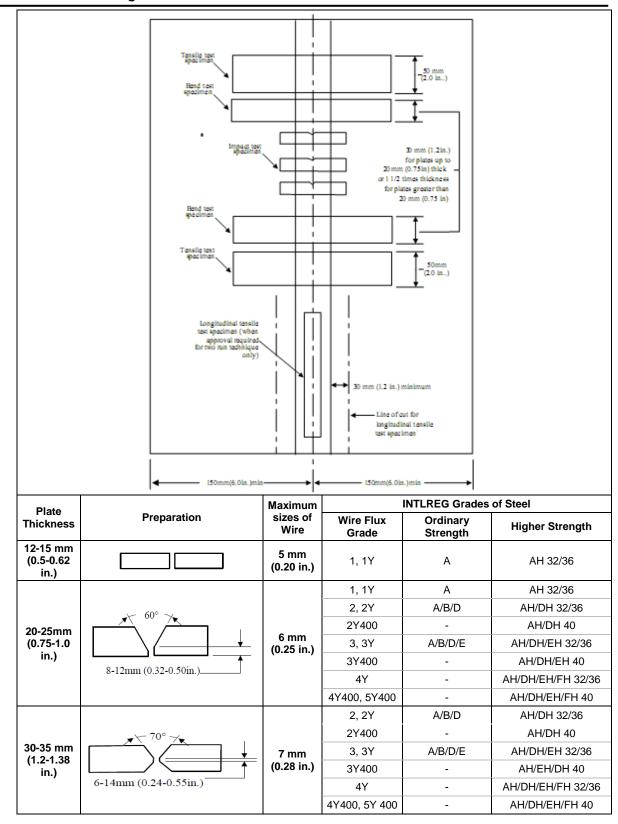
Butt-Weld Test Assembly for Submerged Arc Welding - Two-run Technique
